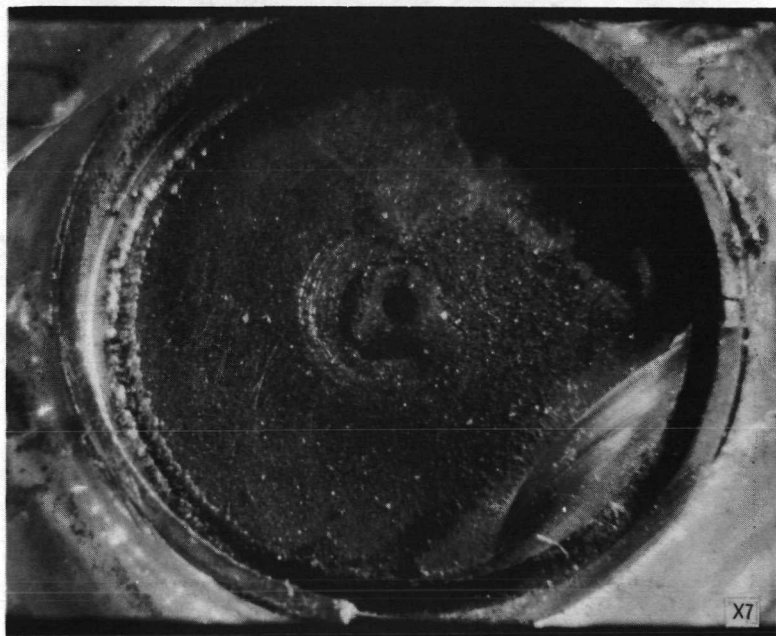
Bottom end cap showing central vent tube, rupture of weld in lower right quadrant, and uranium dioxide deposit on surface. Side of specimen that faced peak flux is at top of photo. Note: scarred area at lower right was caused by false start of cutting wheel.
